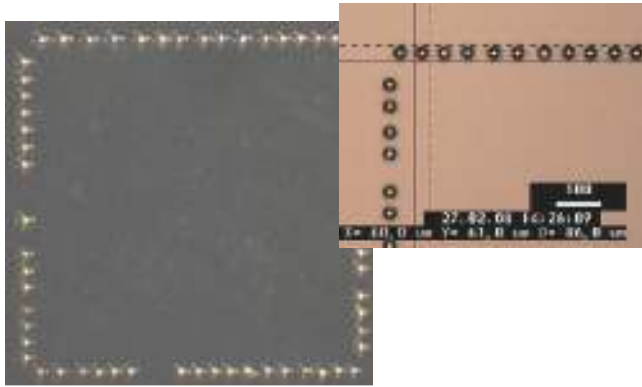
60 μm Flip Chip Sized Bumps Transferred Using the Wafer Level Solder Sphere Transfer Tool.
